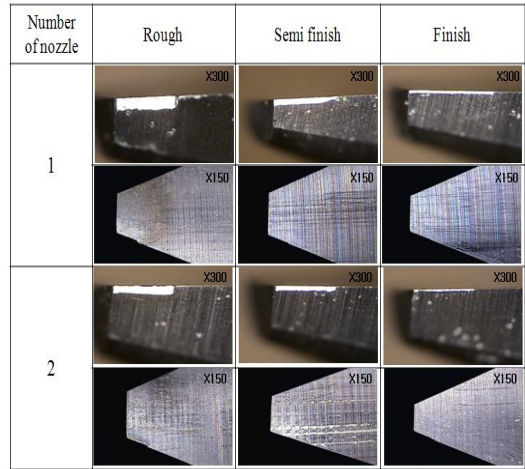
Photograph of tool wear with each cutting step of FFD machining process
